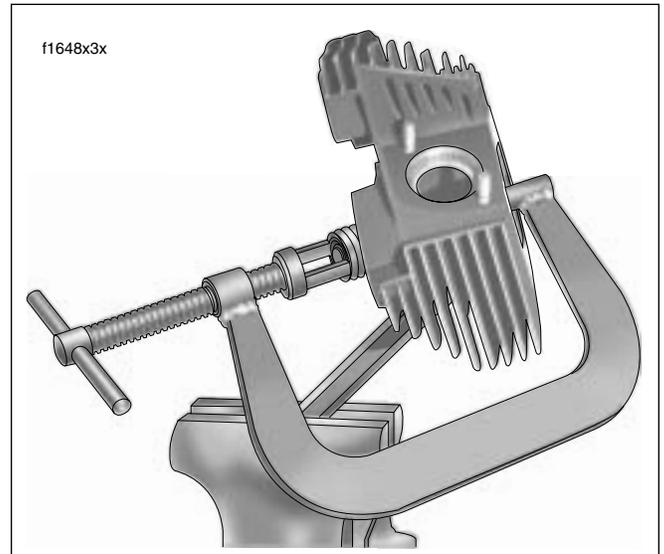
Cylinder Head Holding Fixture (Part No. HD-39786)
